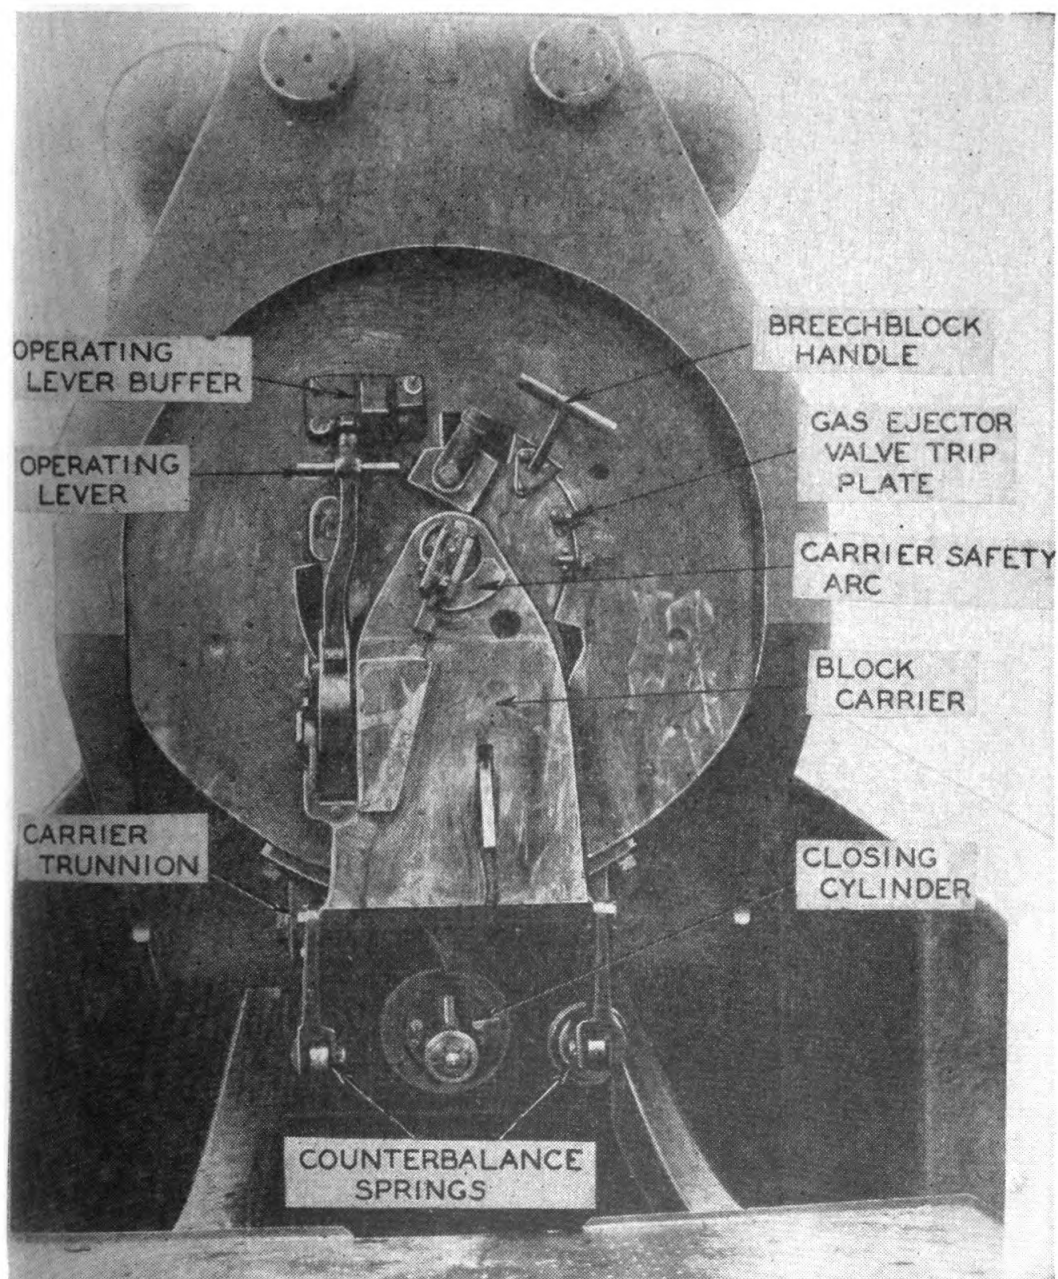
Breech mechanism, 16-inch gun or howitzer (closed).
